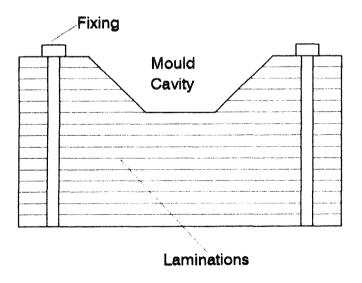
Typical arrangement for holding/fixing laminated tooling.
